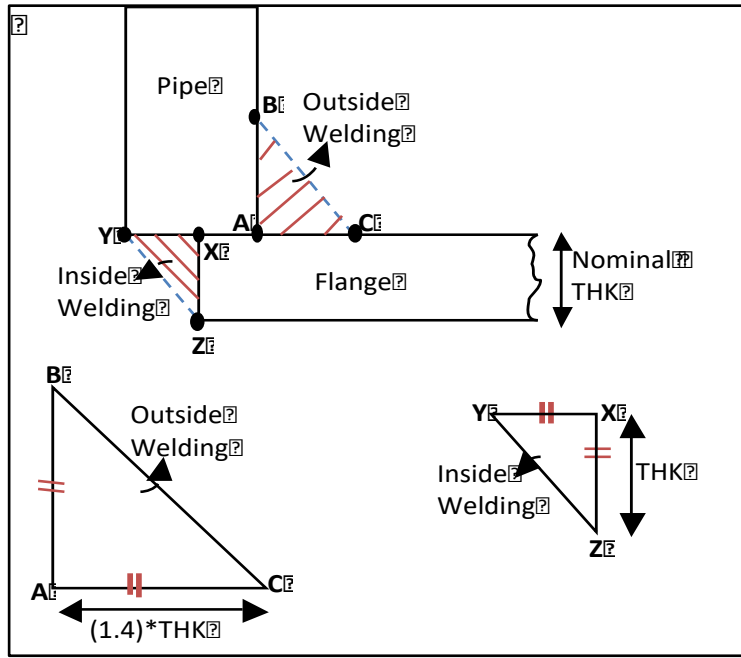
Geometry of Welding Area for RFSO Flange
